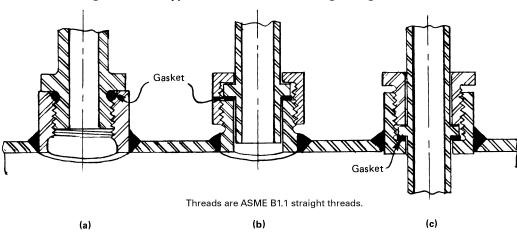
Typical Threaded Joints Using Straight Threads
